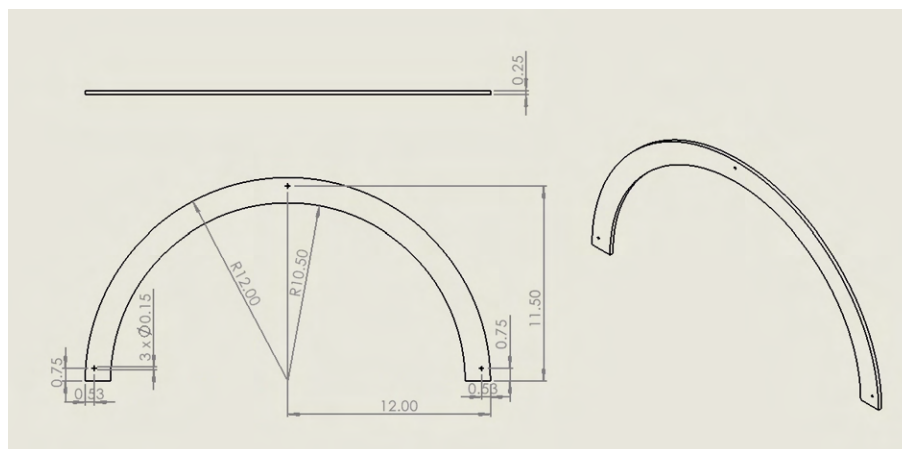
This figure shows the engineering drawing of the arc and its dimensions.
